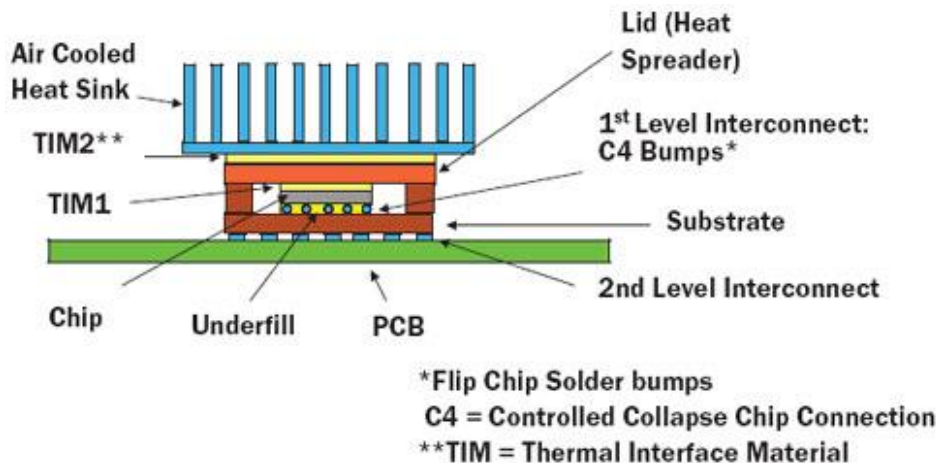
Heat Spreader and Heat Sink on Flip Chip Package
